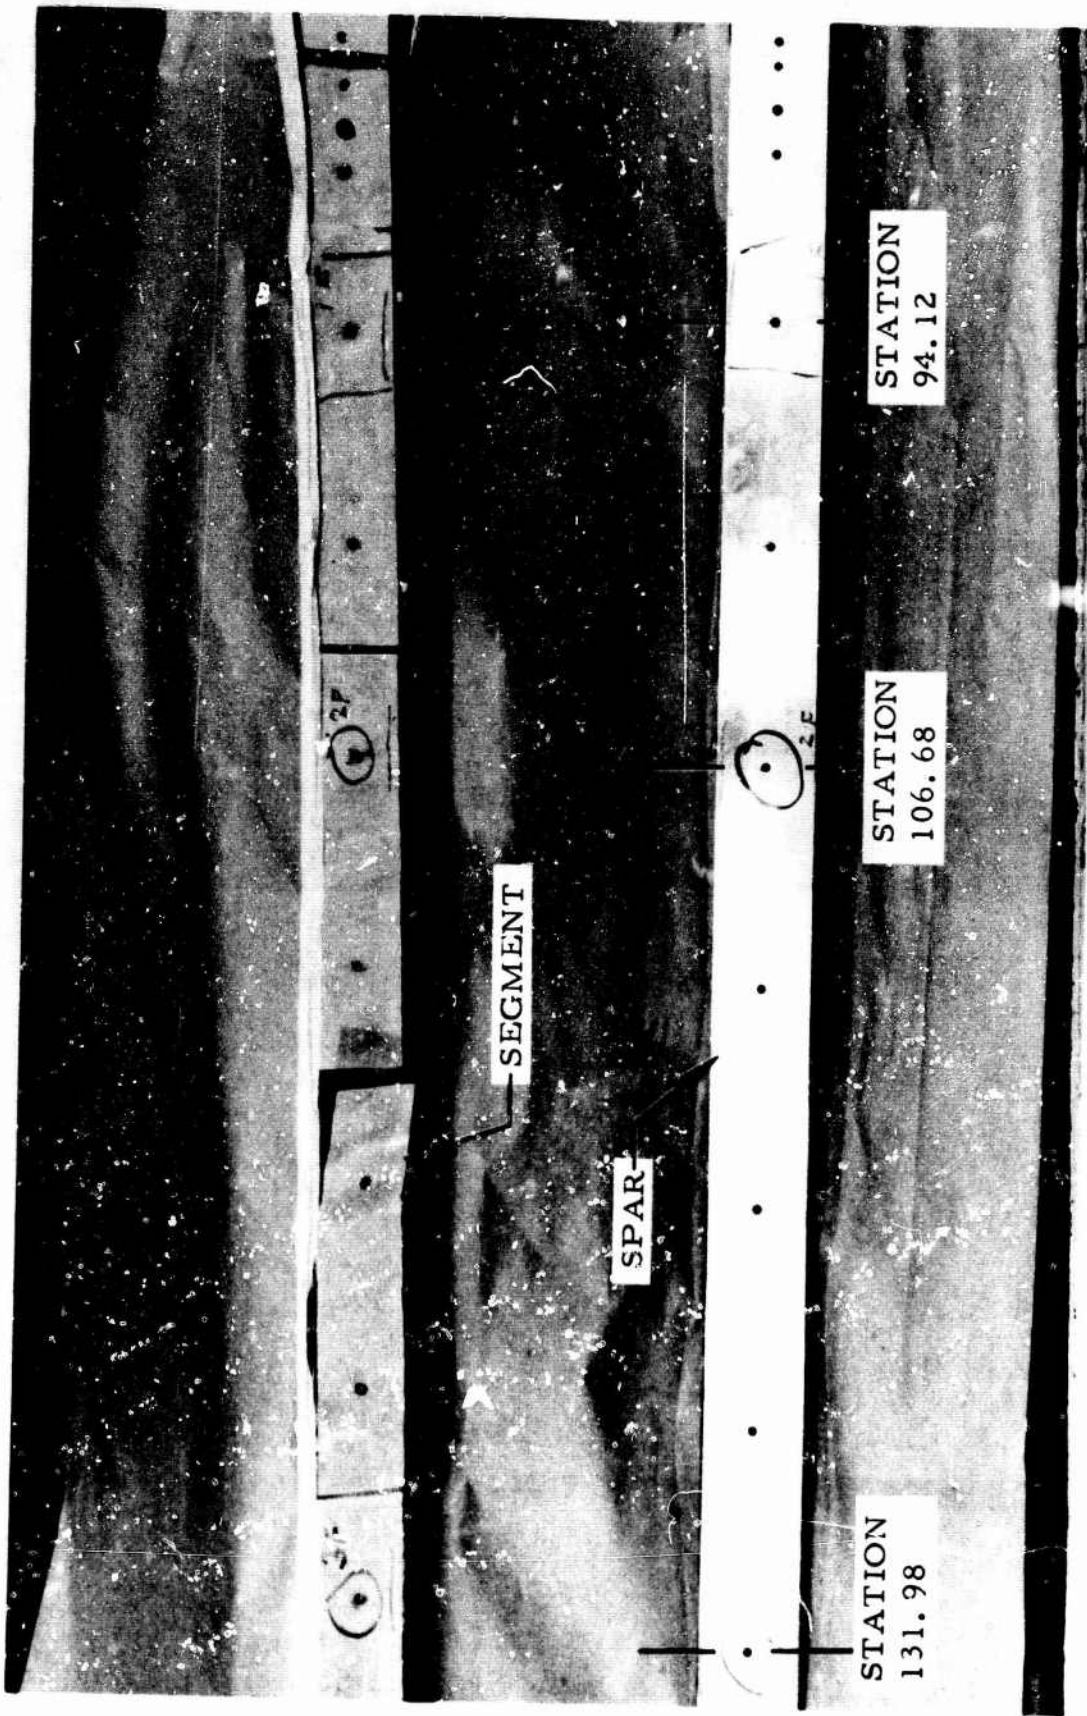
View of Segment Side of Front Spar Showing Location of Three Holes Where Cracks Occurred, Specimen 2.
